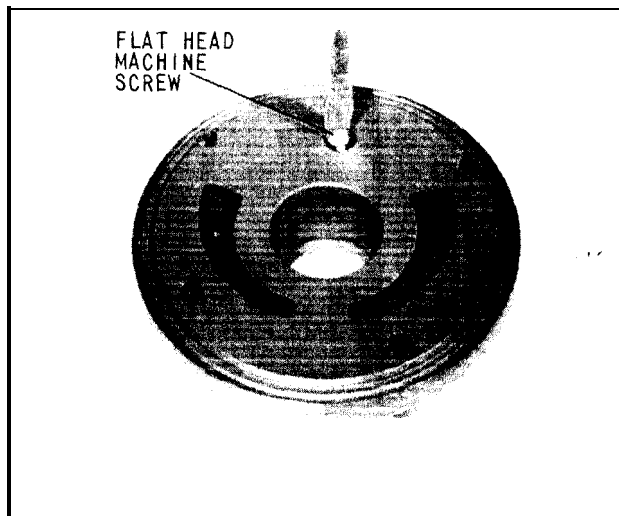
Installing Flat Head Machine Screw through Sacking Plate
